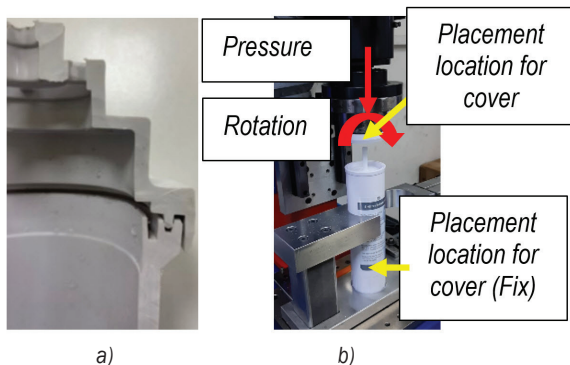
a) First press of inline body and cover, and b) friction welding machine and part layout
